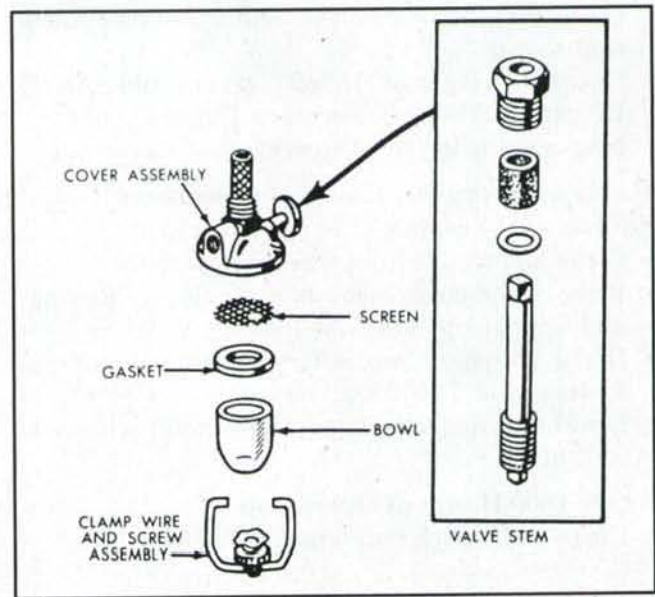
Exploded view of fuel shut-off valve and sediment bowl assembly.
